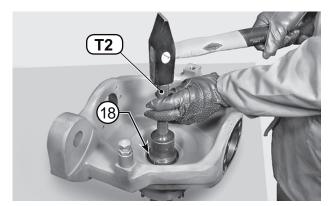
Fit the bushing (18) in the steering case (3) using tool T2 (See drawing T2 p. 26).
